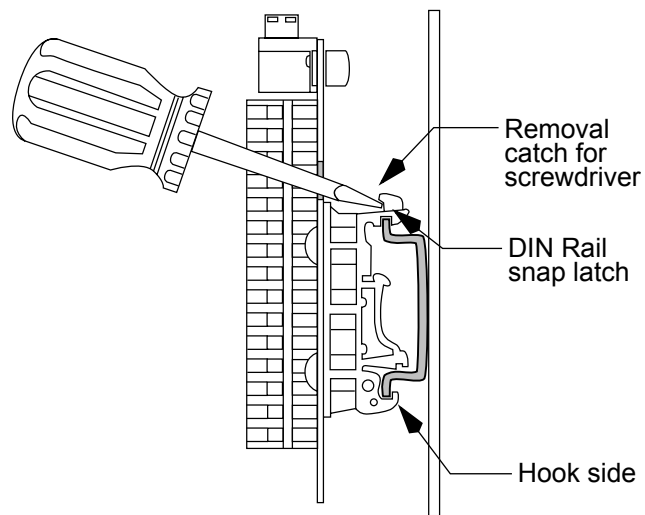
TB50 Mounted on DIN Rail (Side)
